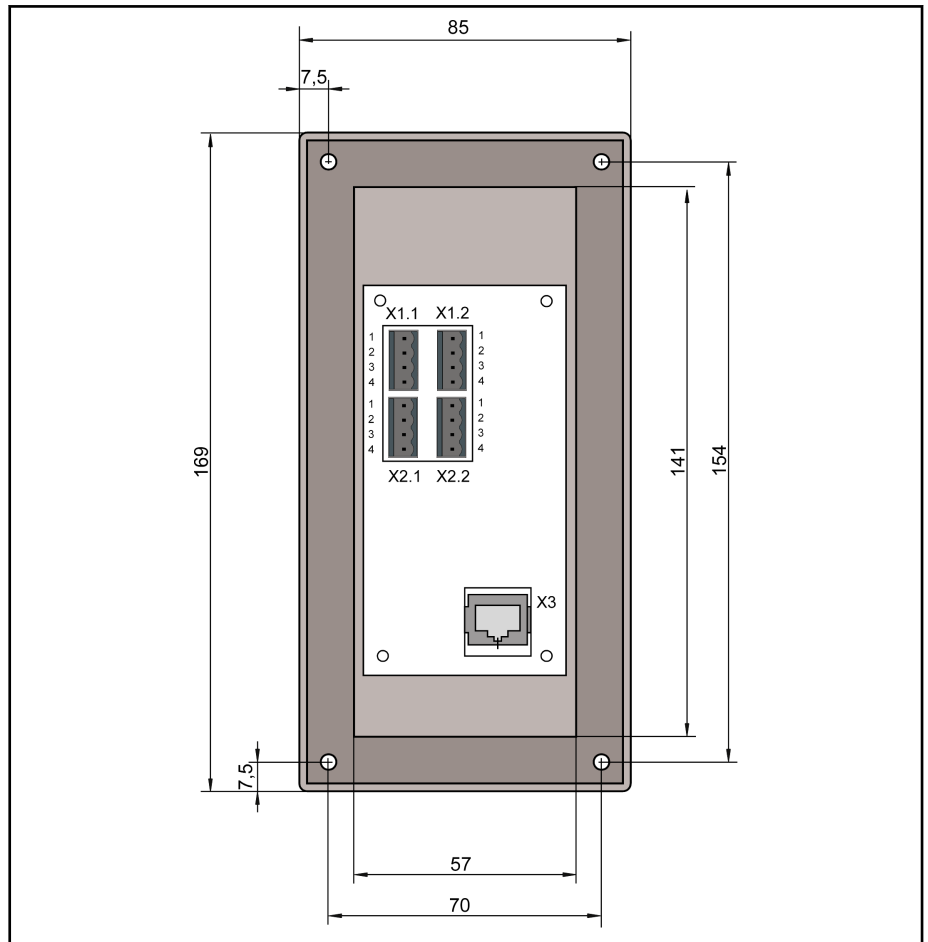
Housing and fitting dimensions, VAC 3x
